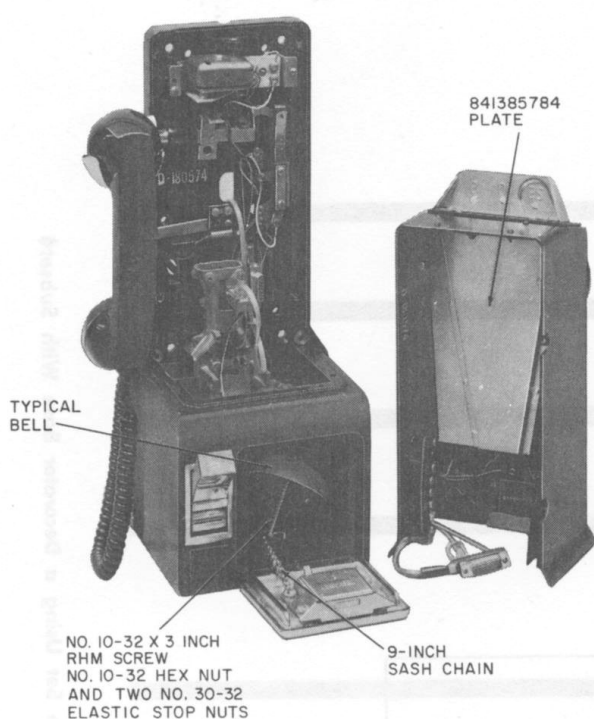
Decorator Set Showing D-180573 Kit of Parts Installed
